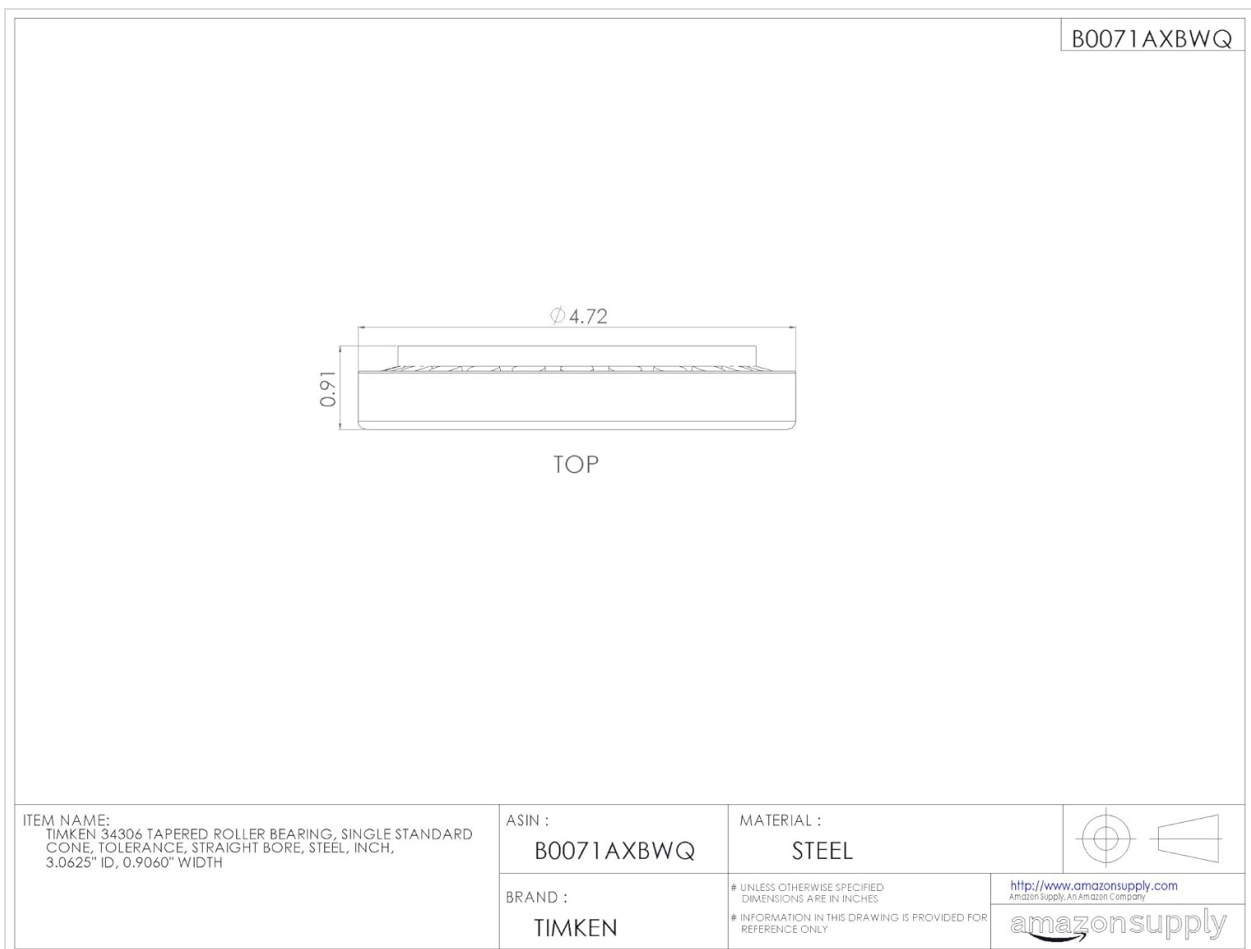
Top view technical drawing of the Timken 34306 Tapered Roller Bearing, showing the overall diameter.
